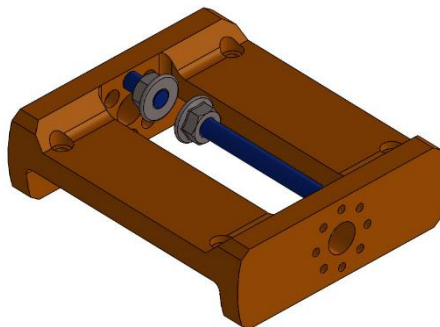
Extra grooves and flanged nut-threaded rod to hold the weapon
